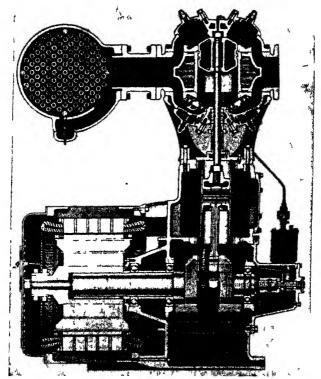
U-crank main shaft supported in ball bearings. (Courtesy of Sullivan Machinery Co)
